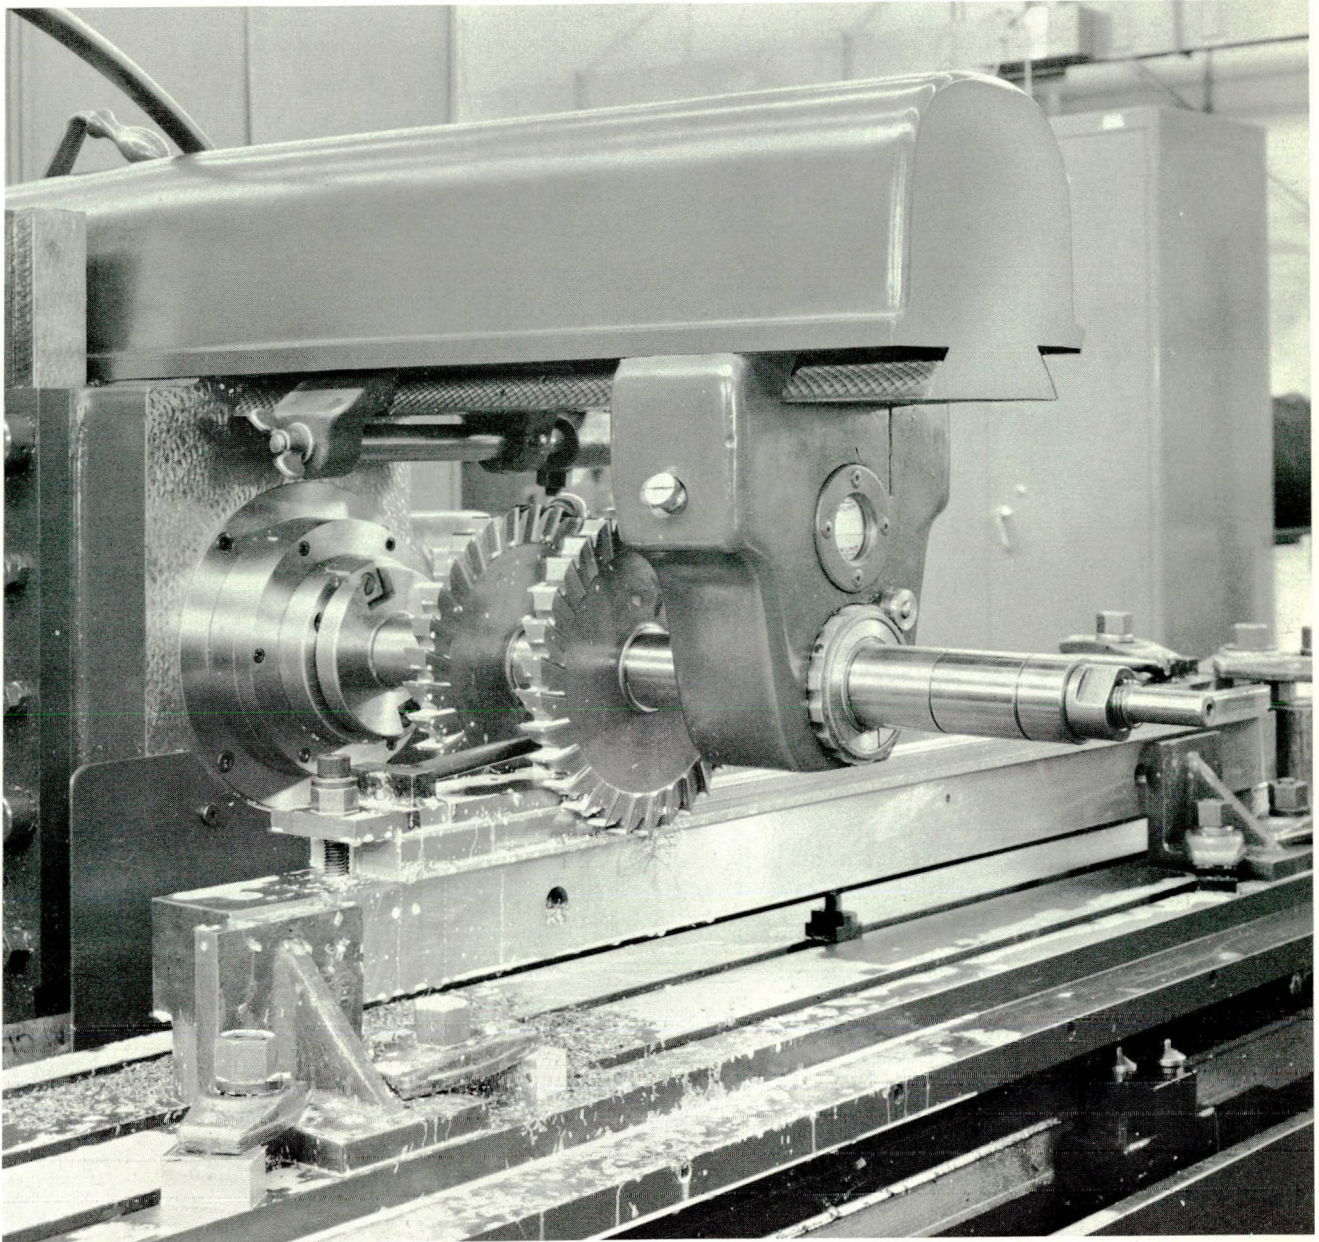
Milling a Batch of 18 Fuel Plates to Final Size
